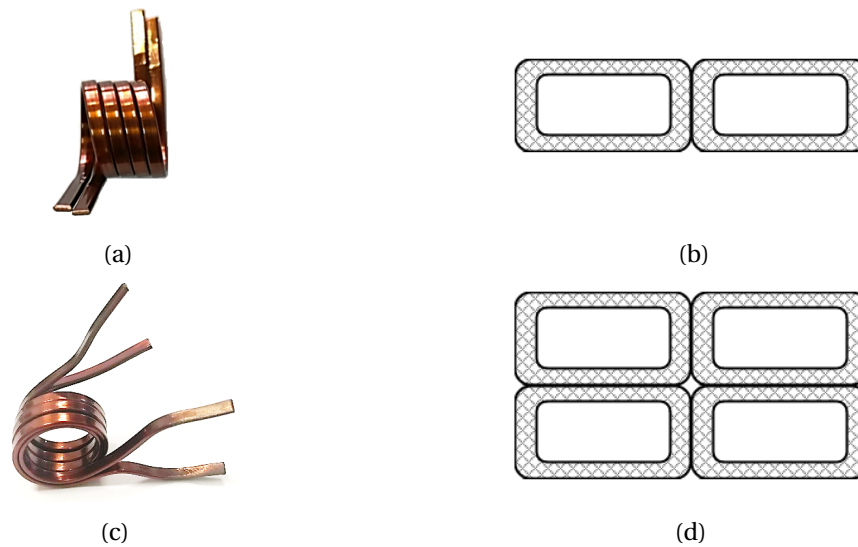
Coil specimen: (a) single layer coil general view and (b) single layer coil cross-section at the contact area, (c) double layer coil general view and (d) double layer coil cross-section at the contact area.
